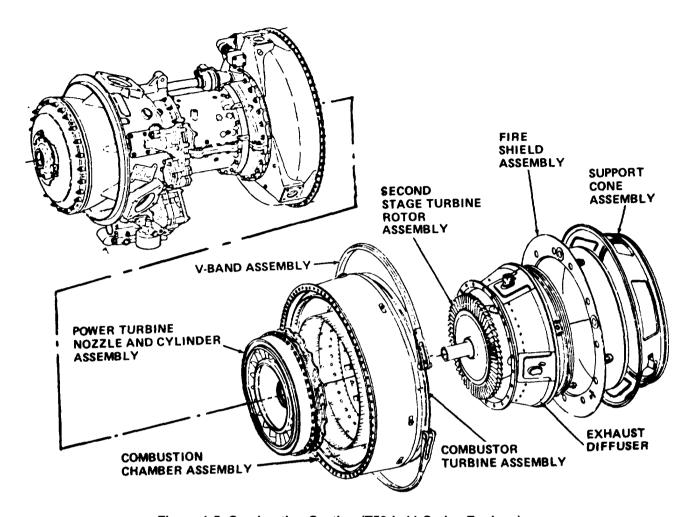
Combustion Section (T53-L-11 Series Engines)
